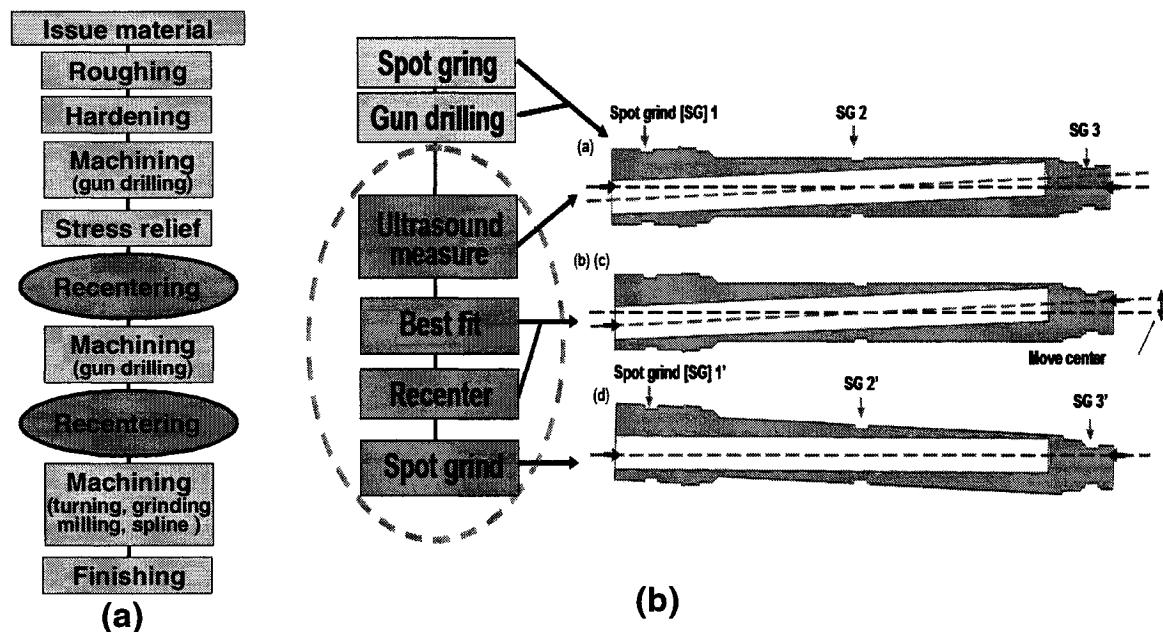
(a) PWC shaft manufacturing process (b) Recentering process
